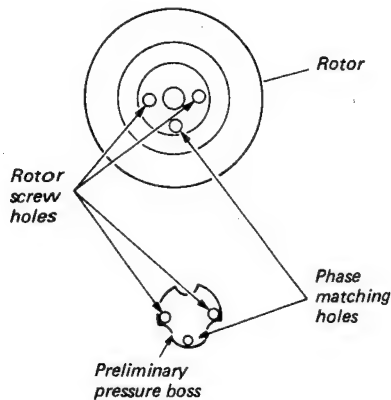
Phase matching between rotor and preliminary pressure boss
